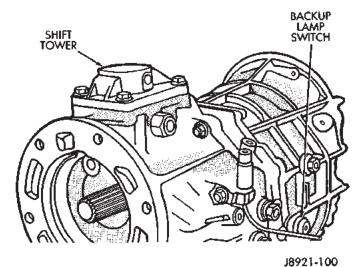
Installing Shift Tower And Backup Lamp Switch
